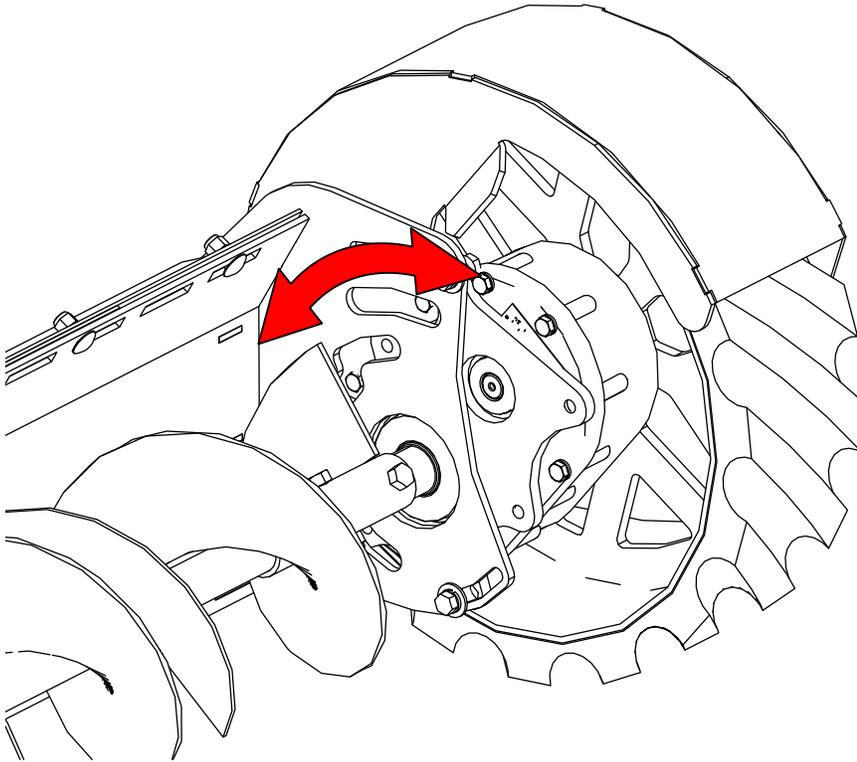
Connect Backboard Mounting Bracket to Backboard Connector
